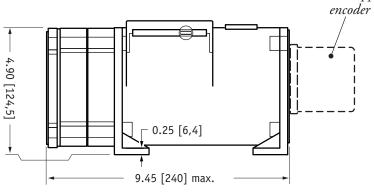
Outline Drawing (36 oz. cable tension only)
